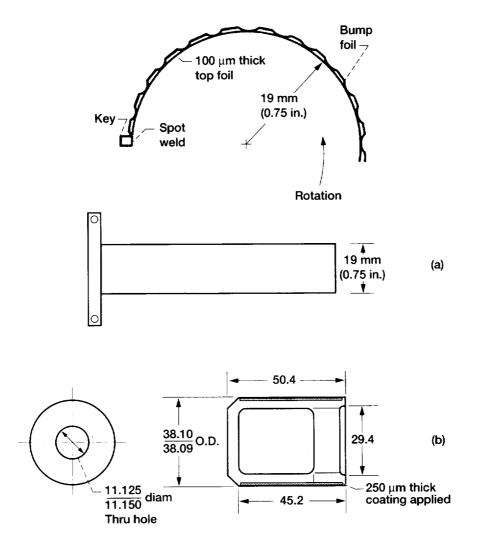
Specimen geometry. (a) Foil. (b) Journal. Units in mm.
